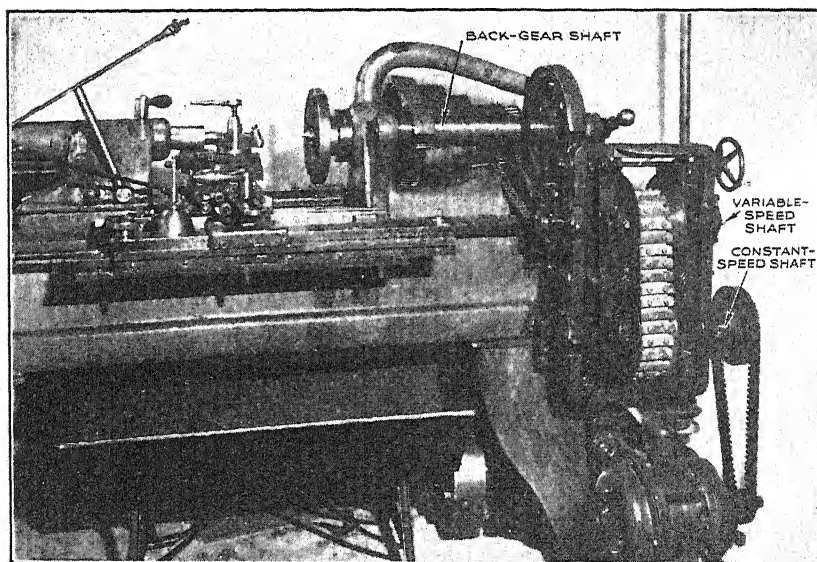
A Cone-Type Hendey Lathe Arranged for Direct Motor Drive through a Reeves Variable-Speed Transmission.
